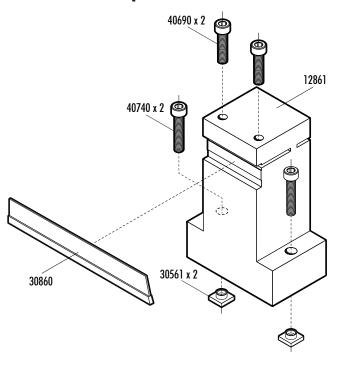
The standard rear-mounted cutoff tool holder (P/N 3018) is shown for reference.
